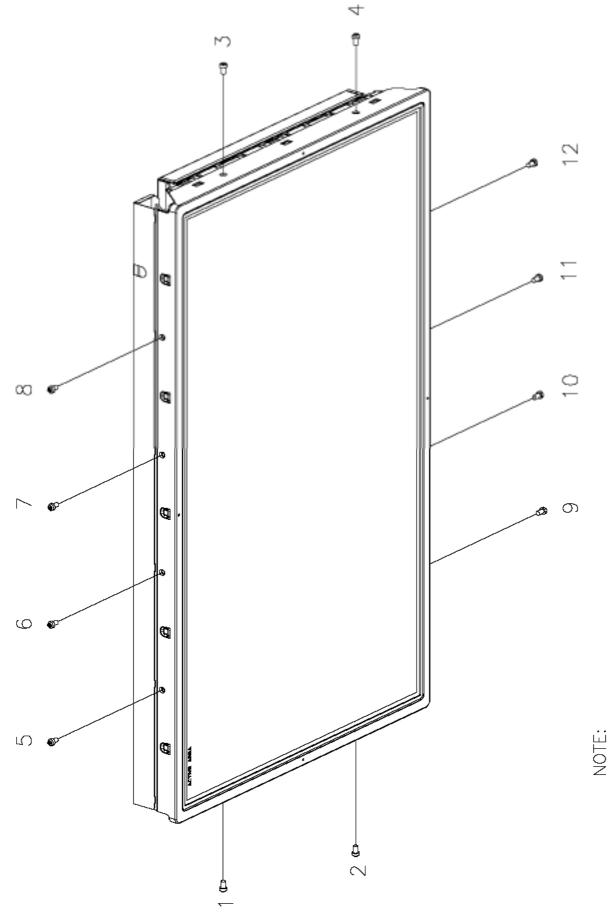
OUTLINE DIMENSIONS (Screws)
